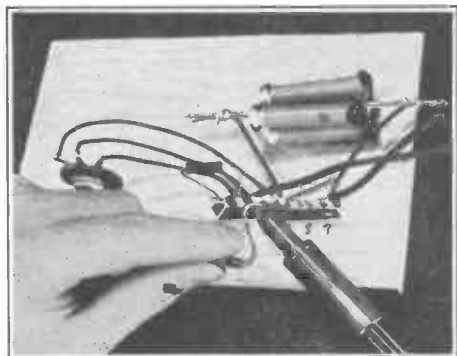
This illustration shows you how to make a temporary soldered lap joint for the purpose of connecting a radio part temporarily between two terminals. This technique allows you to hold the part with one hand (instead of holding the solder in that hand), and gives a joint which can easily be disconnected.
